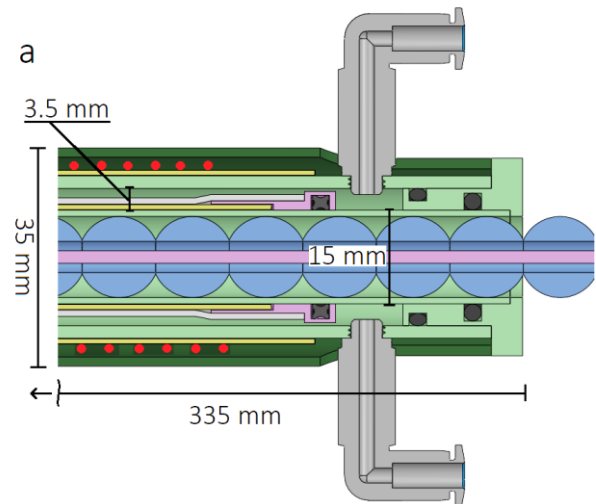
Longitudinal section view of the handle and its most important dimensions, additionally showing shaft material stored in and around the pressure chamber. Housing colors: Pressure chamber (light green), slider (light pink), handle (dark green) and seal rings (black).
